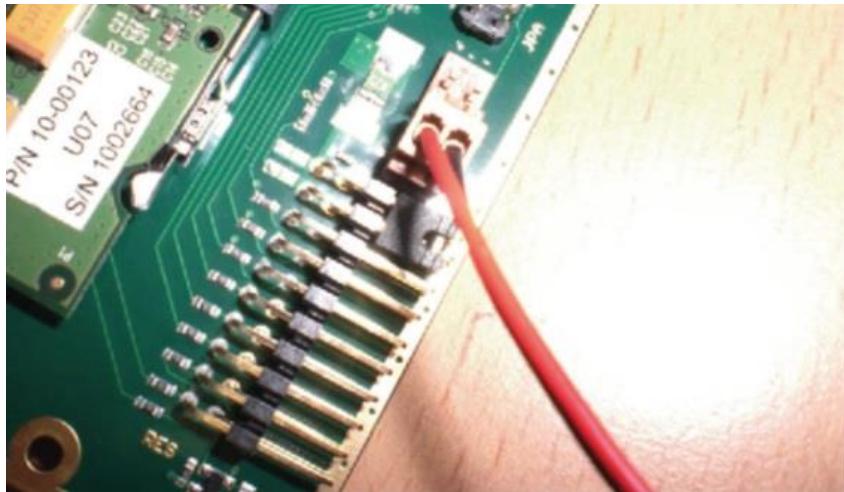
Power Supply, USB 2.0 Only Option Card Via Power Cable in a Mounting Chassis
